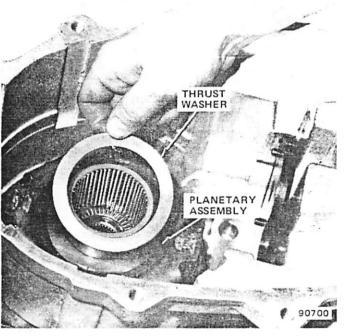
D-60 Planetary Thrust Washer Removal/Installation
